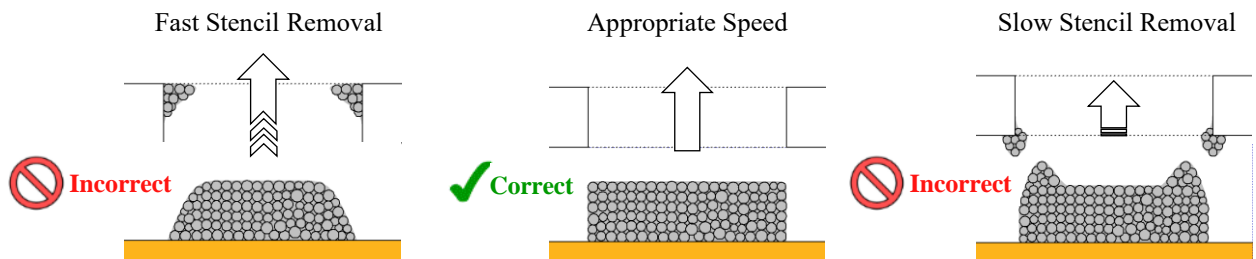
Speed of Solder Stencil Removal and Shape of the Solder Paste
